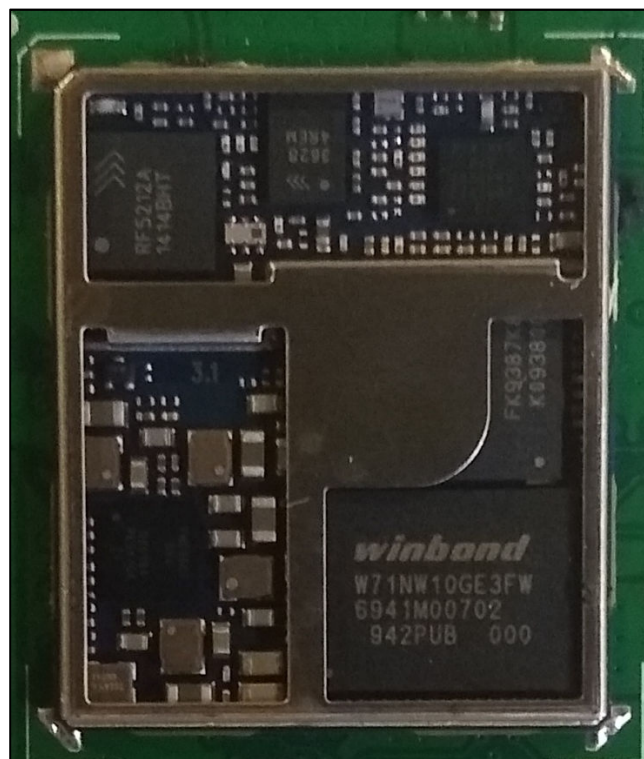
PCB – Heat sensor removed to show Quectel BG96-MC module.
